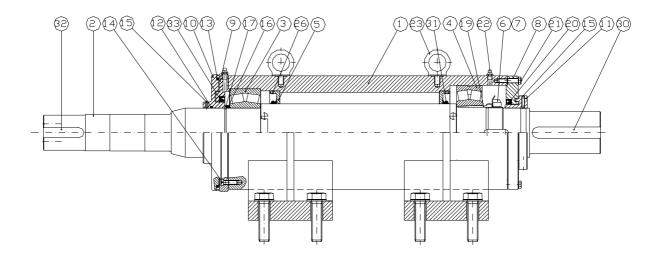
Replacing Bearings and Seals, STOA008688 (STOA004415)
